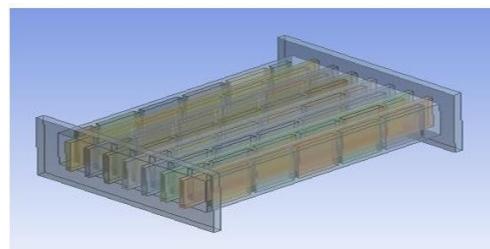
Fig shows Geometric Model of rectangular tube heat exchanger.
